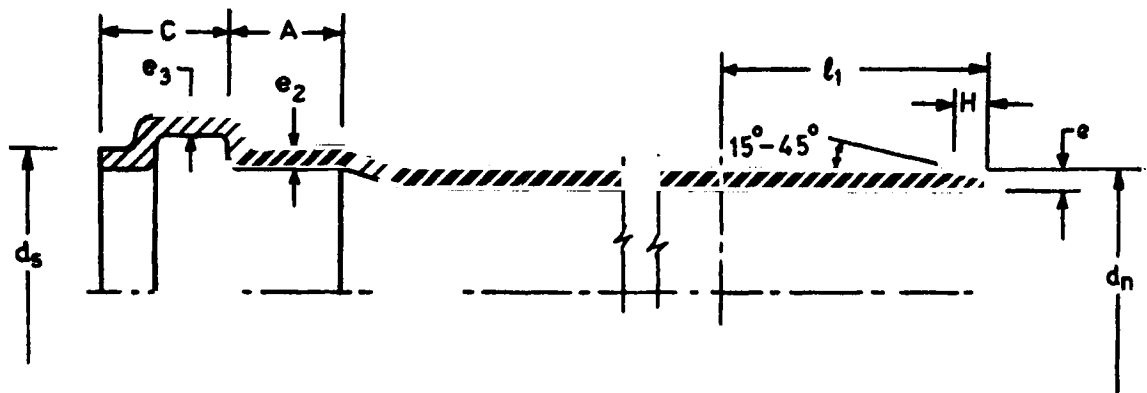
BASIC DIMENSIONS OF INTEGRAL SOCKETS AND SPIGOT ENDS FOR ELASTOMERIC SEALING RING JOINTS
